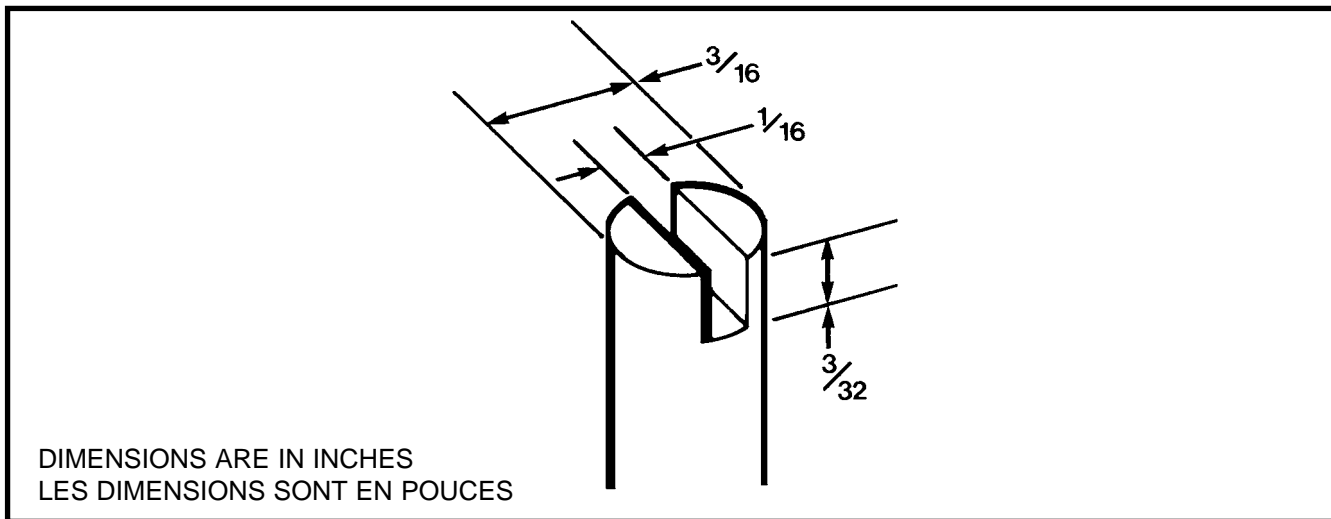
Front Sight Blade Securing Screw Removal Tool
